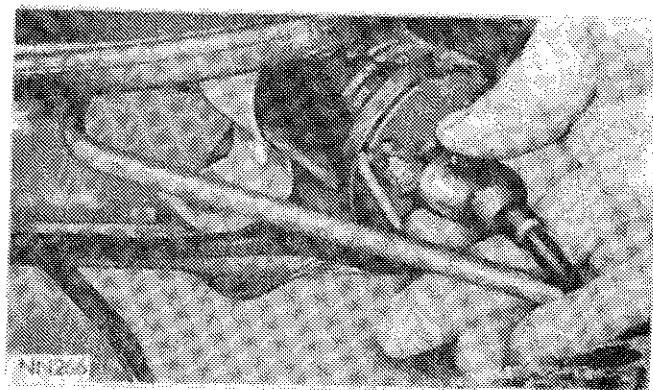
Installing secondary cable and nipple at coil tower (typical)
